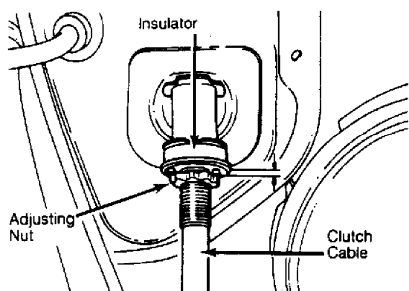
Adjusting Clutch Pedal Free Play (RWD)
